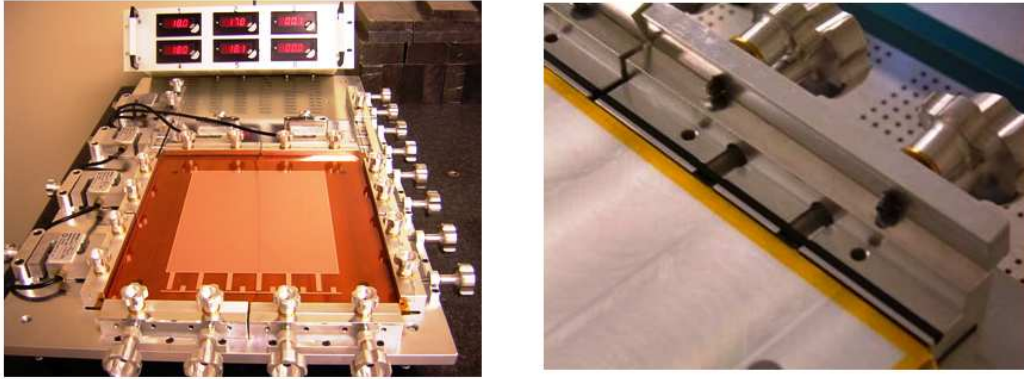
Left: The GEM foil under stretching; Right: a close view of the jaw, equipped with a plastic O-ring, used to clamp the foil.
